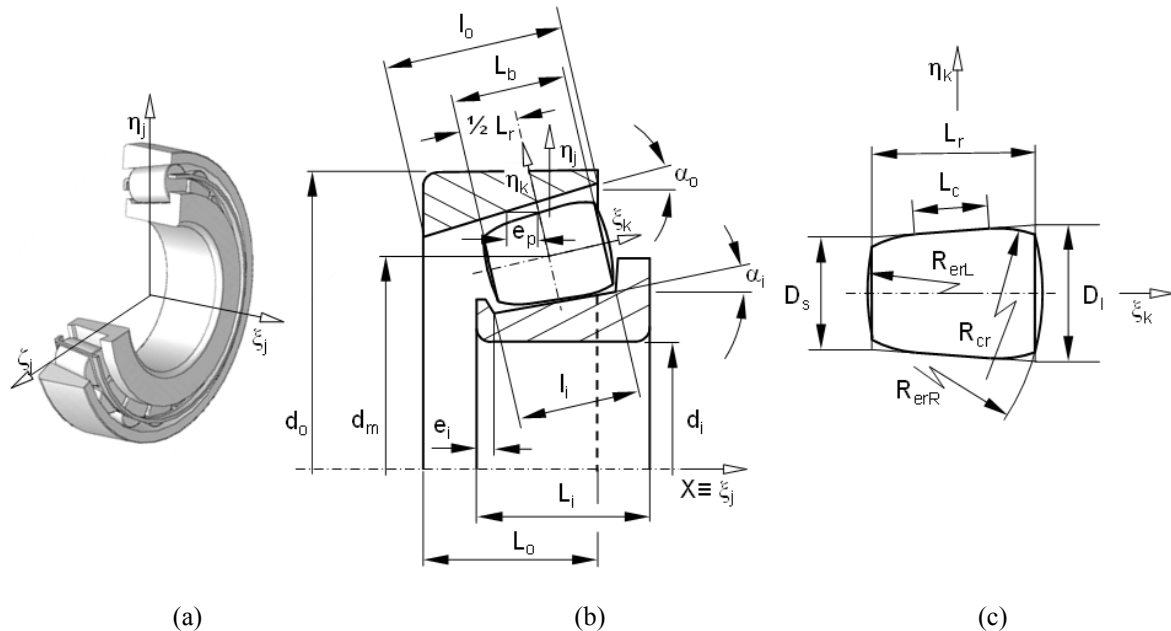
Geometry of the tapered bearing elements. (a) Tapered bearing representation; (b) Geometry of the cross-section of the roller bearing; (c) Geometry of the tapered roller.
